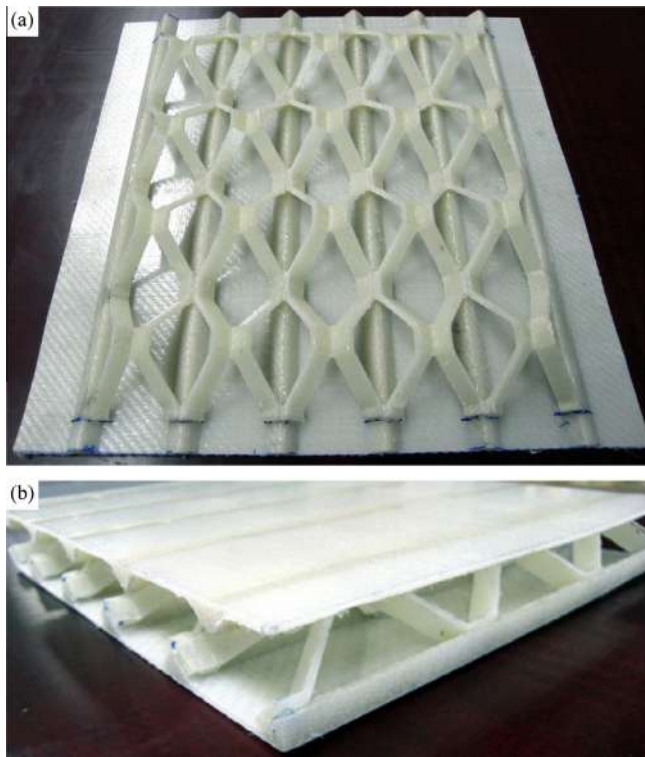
(a) SrPET lattice truss core which has been hot-plate bonded to one face sheet with reinforcing stringers and (b) final sandwich plate with stringer reinforced face sheets and a lattice truss core.
